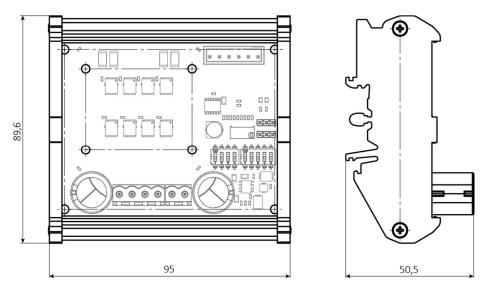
Dimensions of stepper motor driver SMD-4.2 carrier kit version
